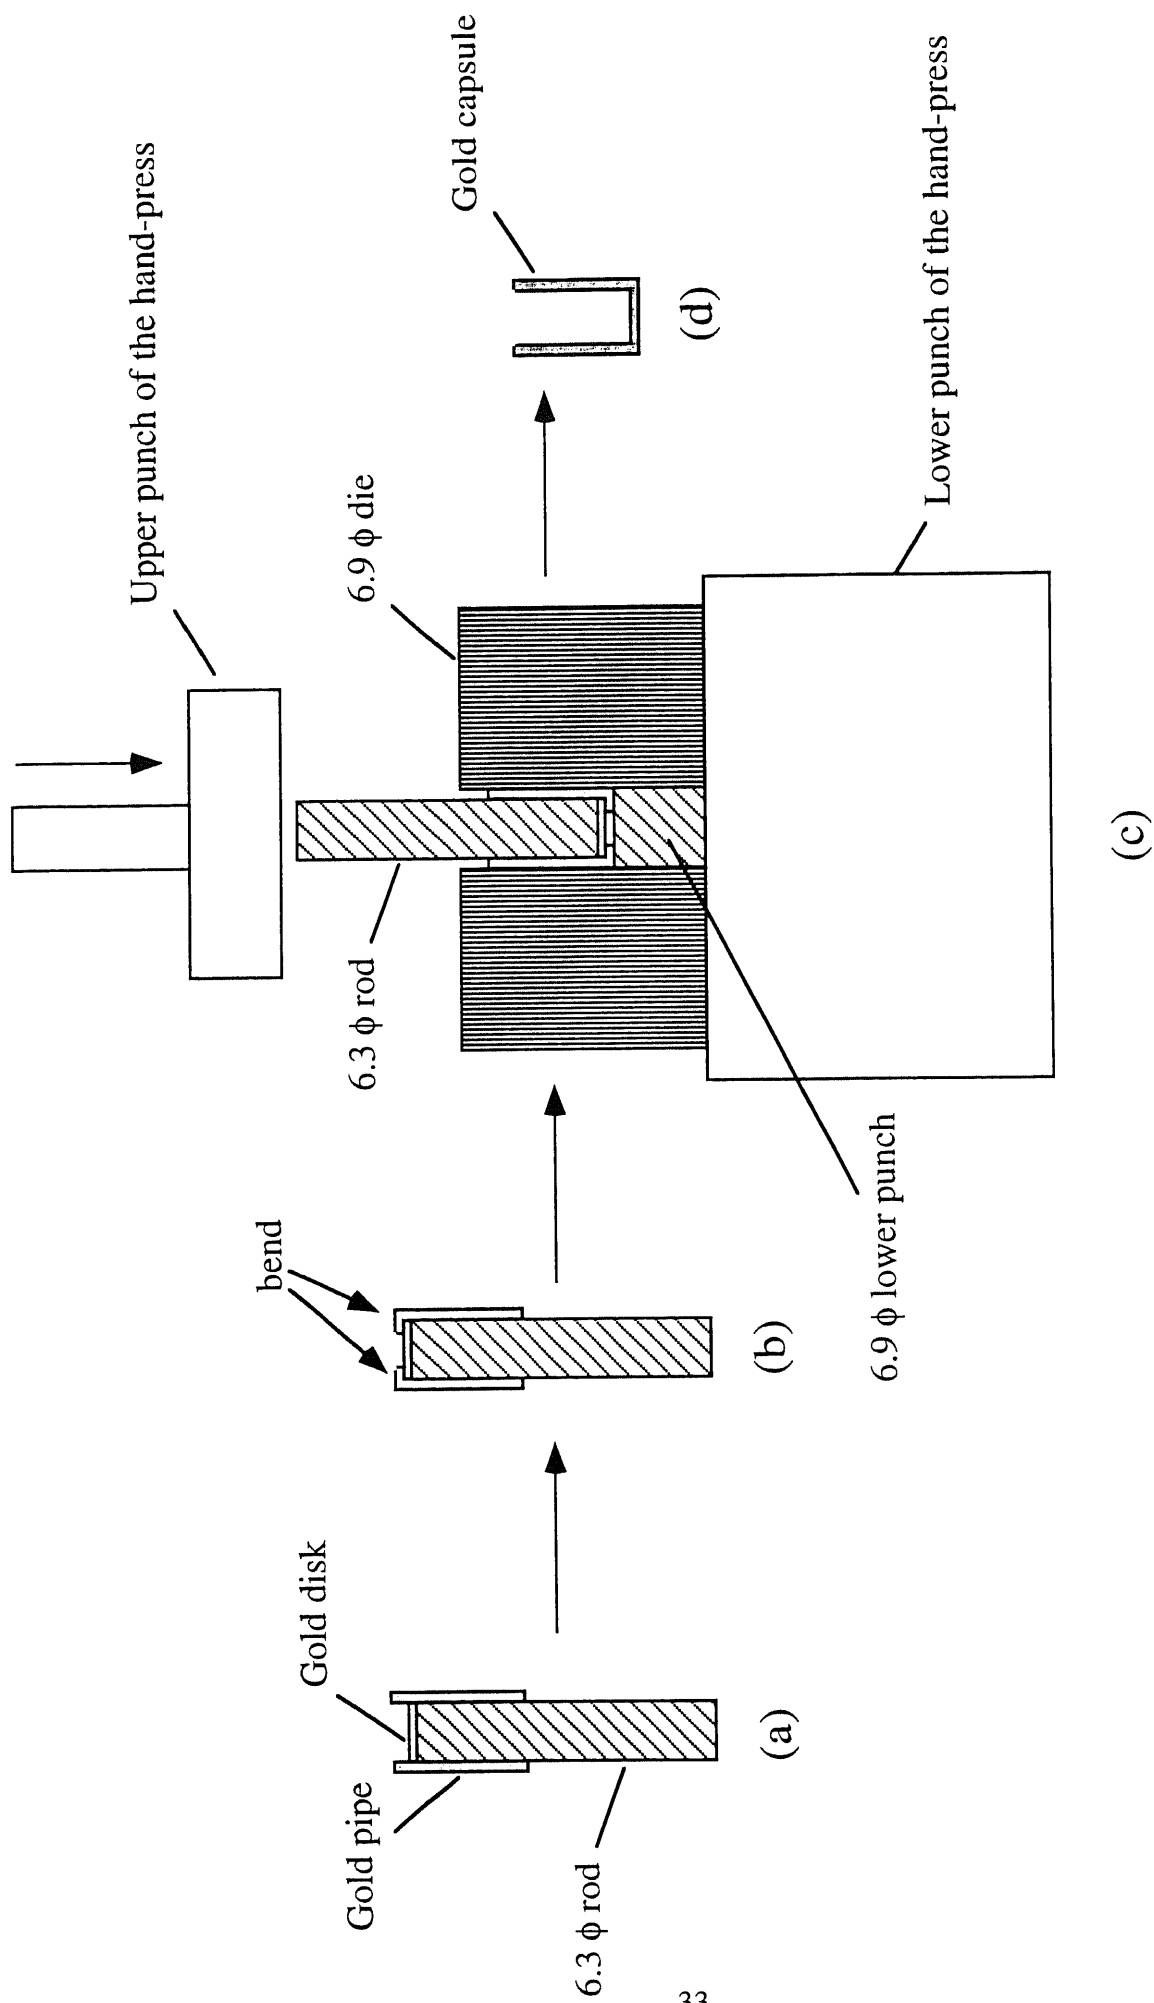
The way of manufacture of gold capsule (Cross section)
